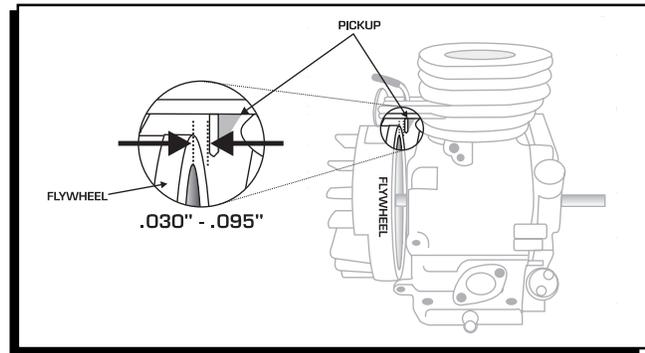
Checking the Air Gap of the Flywheel and Trigger Pickup.
